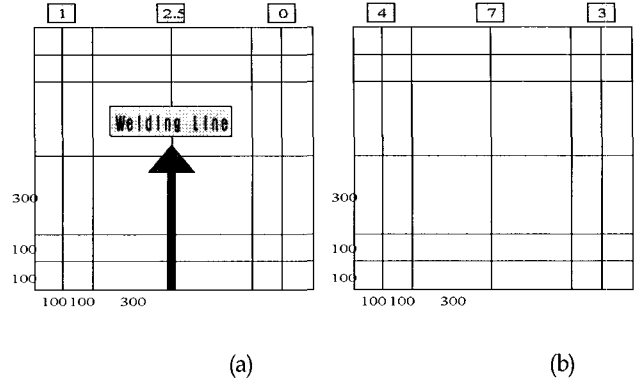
Longitudinal shrinkage of experimental model, in mm. (a) front side 1 layer-welded specimen, (b) back side 1 & 2 layer-welded specimen.
